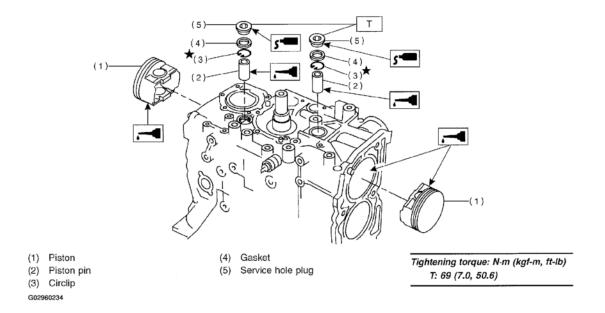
Applying Fluid Packing To Piston, Piston Pin & Service Hole Plug Courtesy of SUBARU OF AMERICA, INC.
